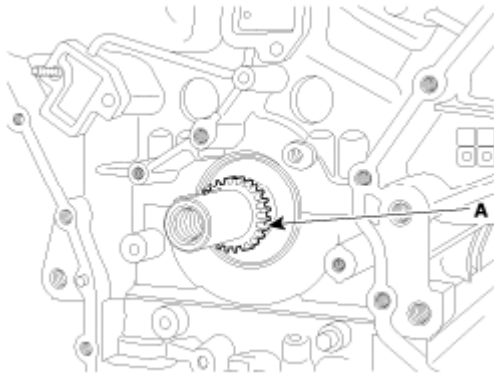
Identifying Crankshaft Sprocket (LH Camshaft Drive)
